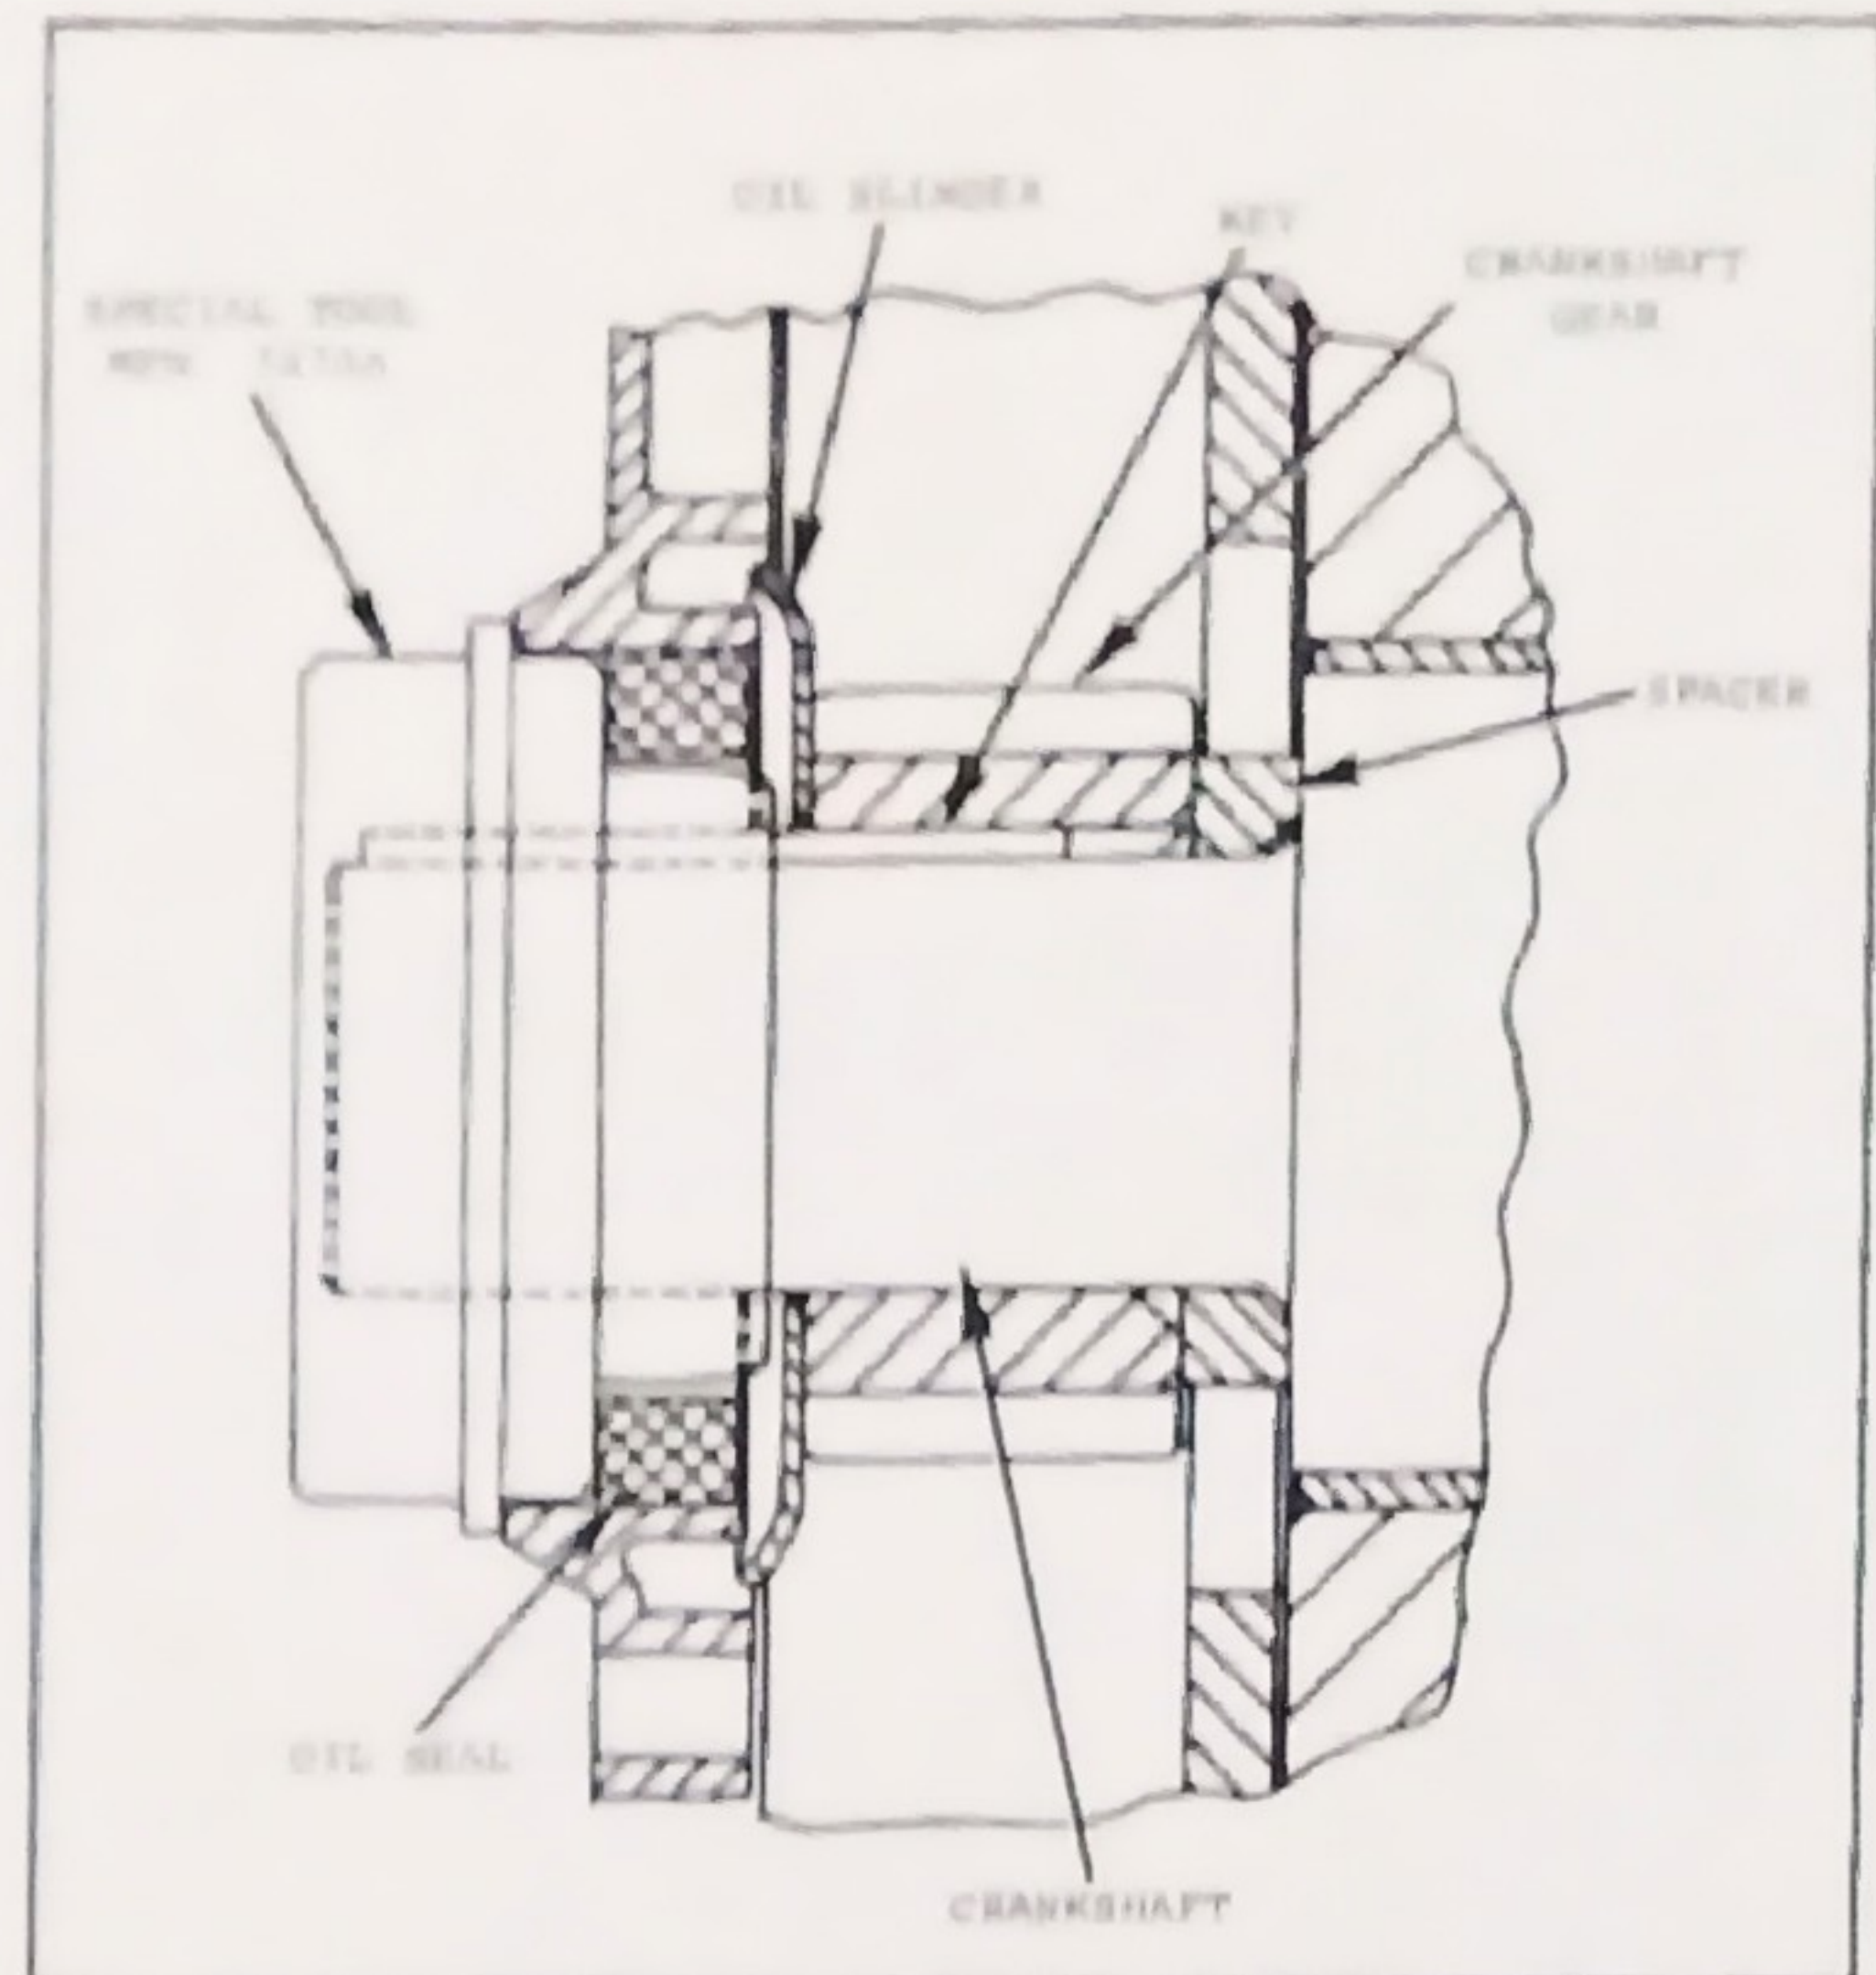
Sectional View Showing Oil Seal Locating Side of Special Tool MFN 747 AA - Shown with Cover Installed. Note Direction of Oil Slinger and Timing Gear Spacer
